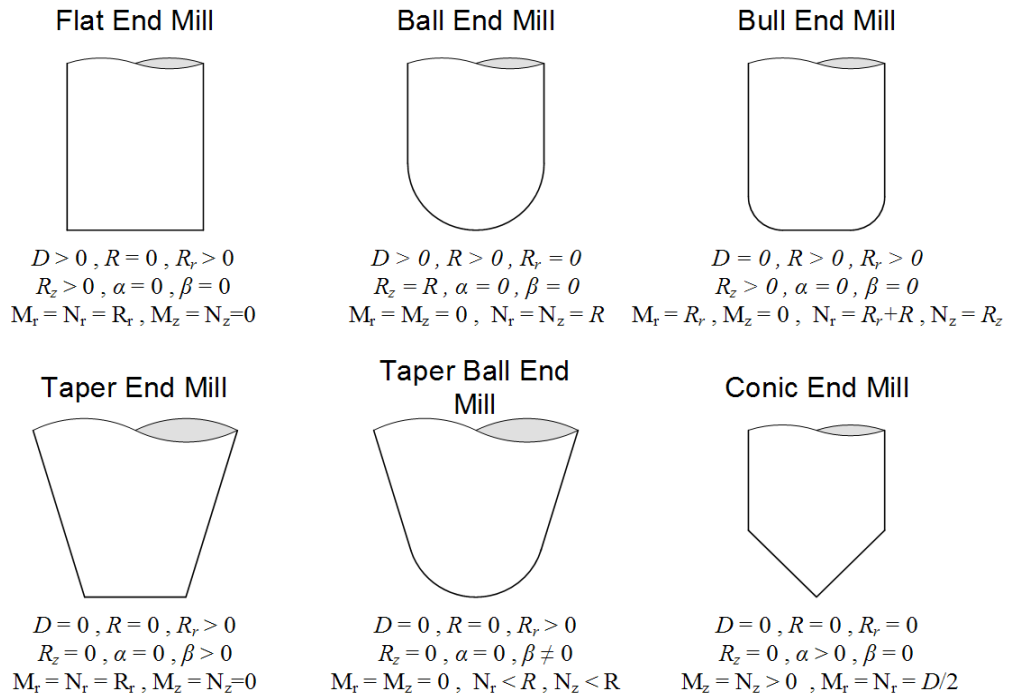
Standard milling cutter shapes and corresponding parameters
